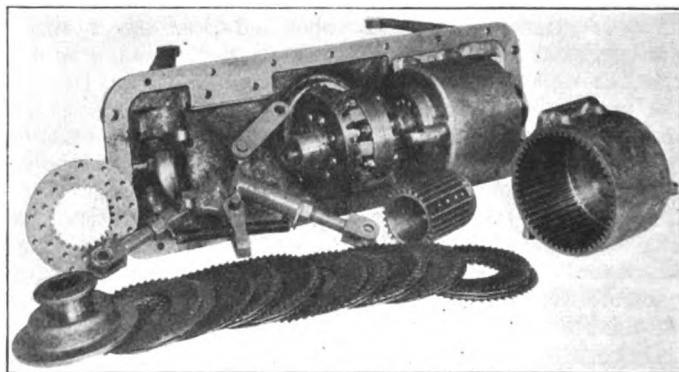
THE CONSTRUCTION OF THE BRAKE IS VERY SIMILAR TO THAT OF A MULTIPLE-DISC CLUTCH
